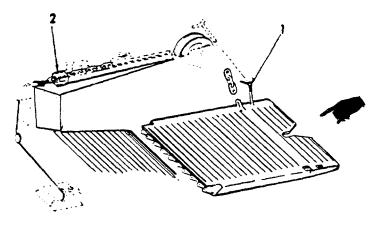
Bow Ramp Machinery. (Sheet 1 of 2)
